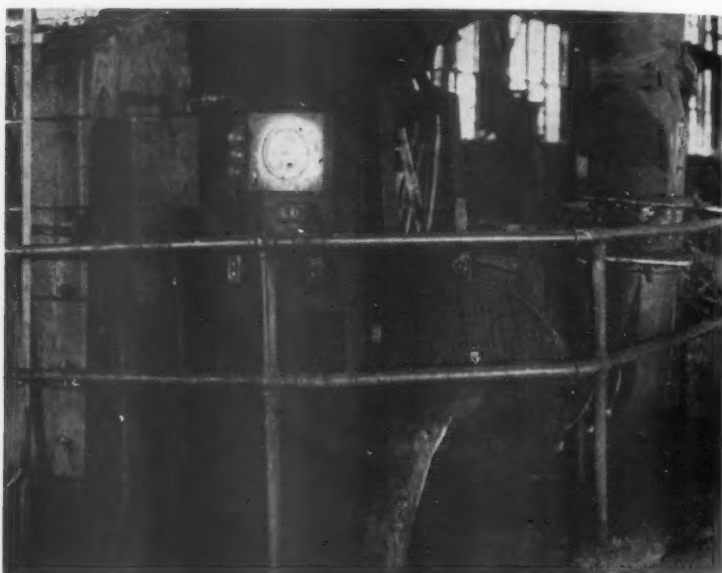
BURNER END OF MELTING FURNACE AND CONTROL BOARD FOR COAL- AND AIR-FEEDING MOTORS.
